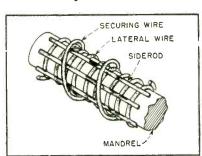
Inside-out grid strip assembly, showing mandrel, lateral wire, siderods and external securing wire
